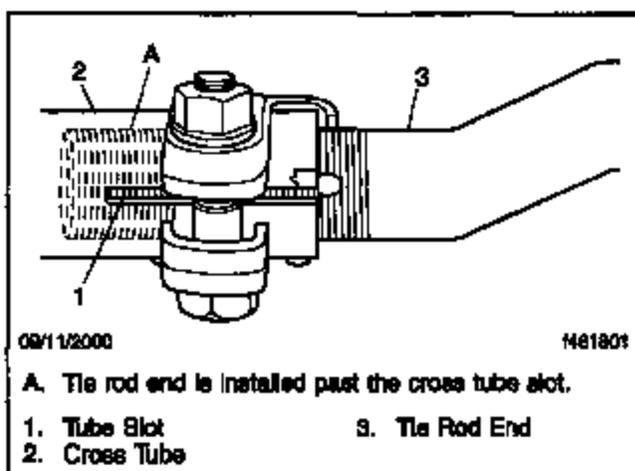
, Bottom View of Tie Rod End and Cross Tube
